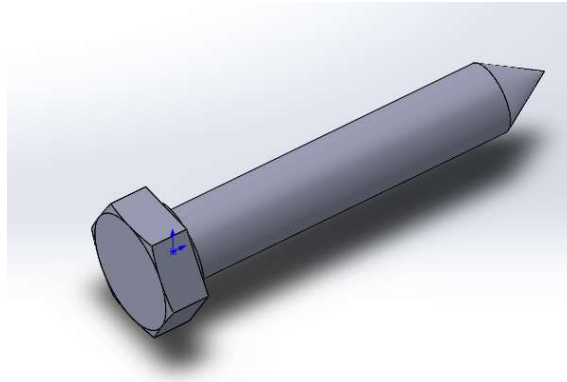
ISO 4017 M6 30° Mechanized CAD
